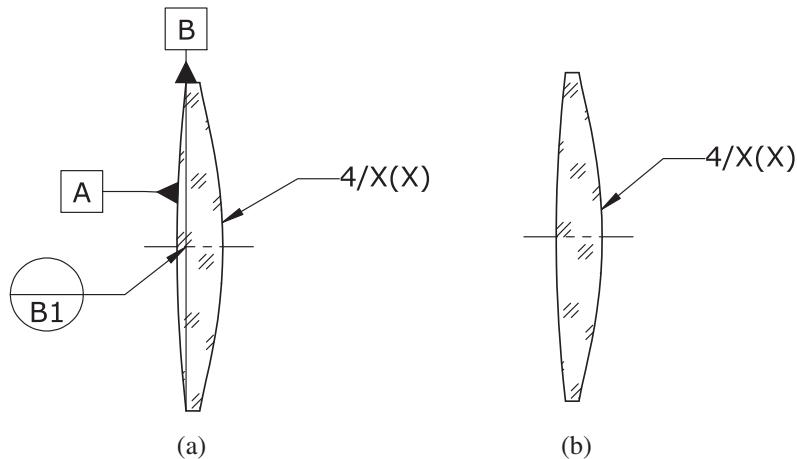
Tolerance applied to the right optical surface, an aspheric surface, that references both the left optical surface and the cylindrical surface as the datum (a) explicitly and (b) implicitly.
